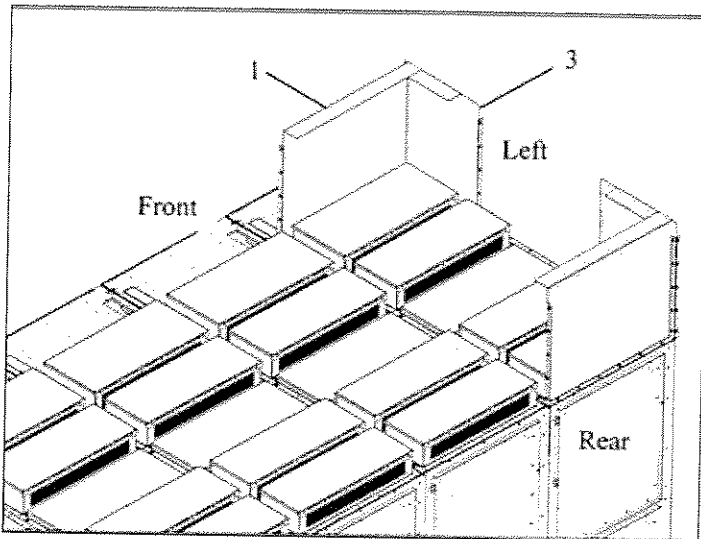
Detail of the Left Front Corner of the Arc Exhaust Wall.
